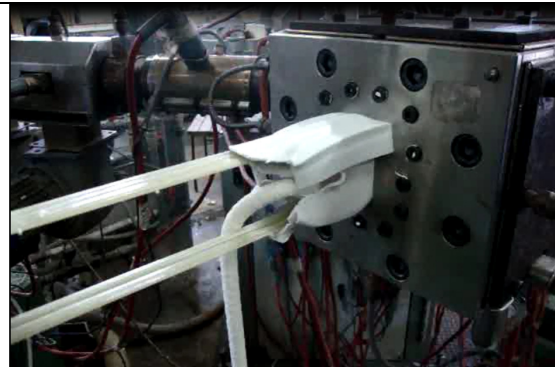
Detailed picture about the pultrusion system, Rossi Stamp proprietary technology. A, Glass fiber passing throughout the die during the co-extrusion of PVC-PS foam.
